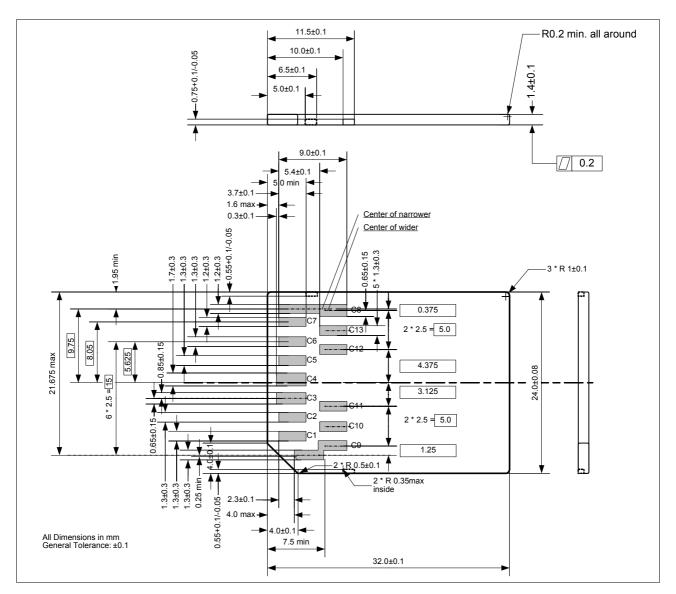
Dimensions Of A Normal Size MultiMediaCard (Bottom View, DIN)
